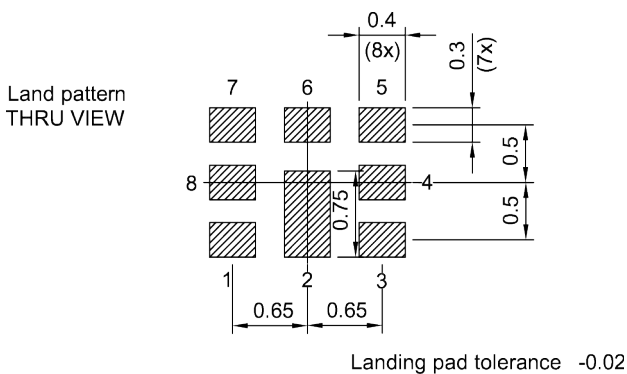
Drawing of package with package height A = 0.475 mm (max.). See Simplified drawings (p. 24).
